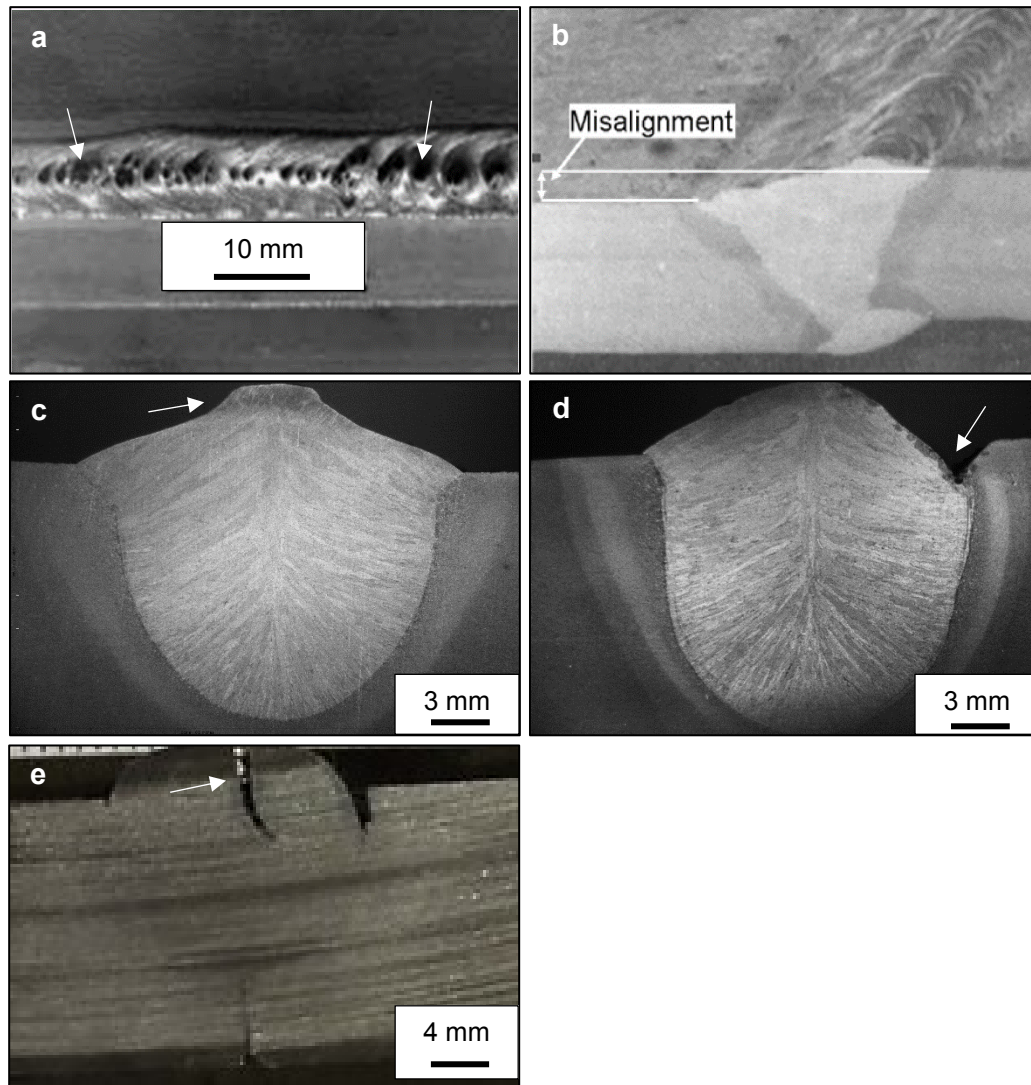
Macrographs of typical surface defects in welds: (a) Surface porosity [319] (b) misalignment, (c) excessive reinforcement, (d) undercutting and (e) solidification cracking.
